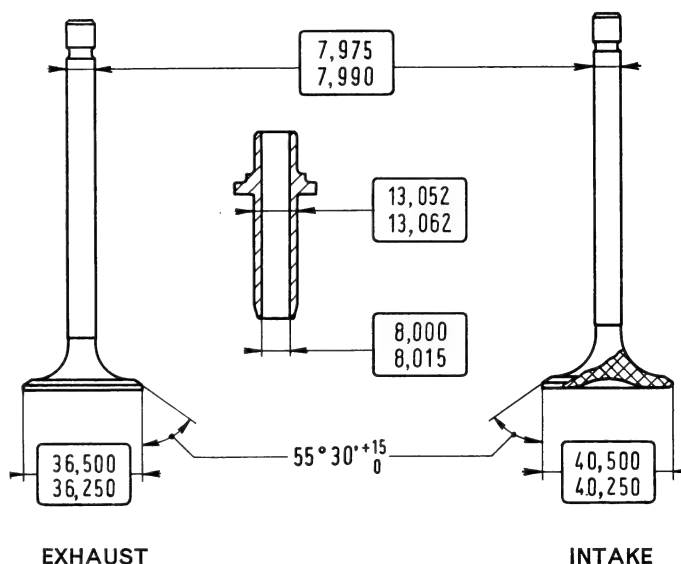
Critical dimensions (in mm) and angles of 118 B.000 engine exhaust and intake valves and valve guides.
